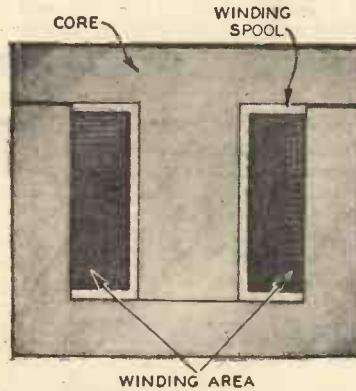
Showing the winding area available after fitting the spool on the core stampings.
